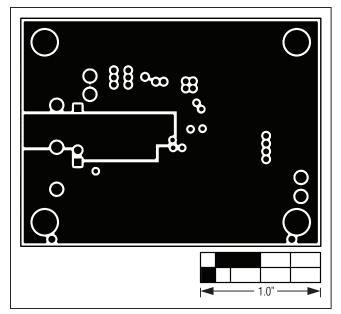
MAX16955 EV Kit PCB Layout—PGND and SGND Layer 3
